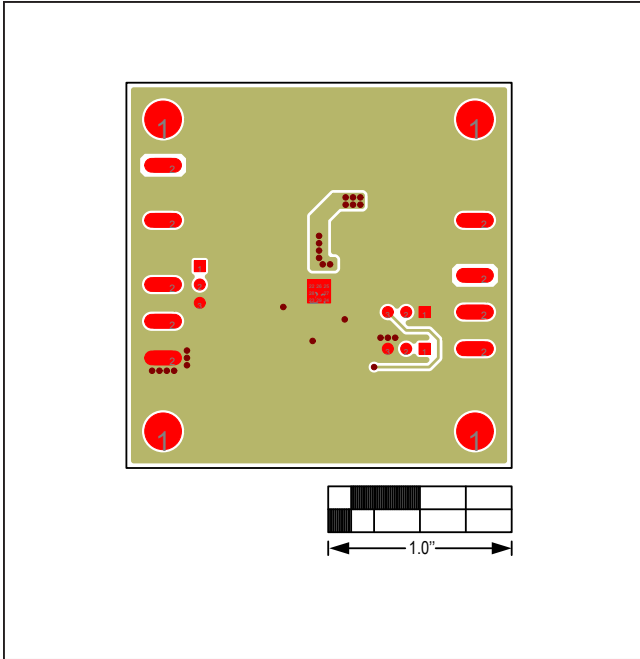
MAX17544 5V Output EV Kit PCB Layout—
